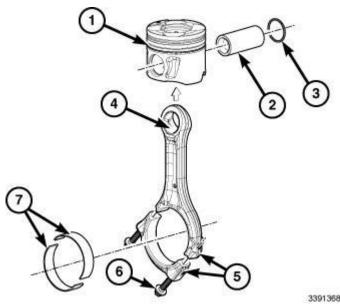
Piston & Connecting Rod Components Courtesy of CHRYSLER GROUP, LLC
